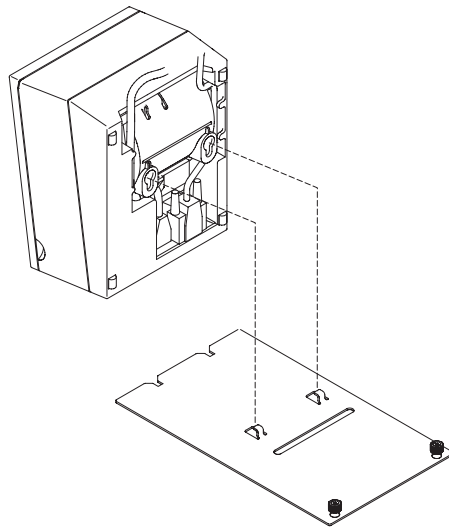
Attaching the 4610 TF6 or TF7 printer mounting plate for a non-keyboard integration tray
